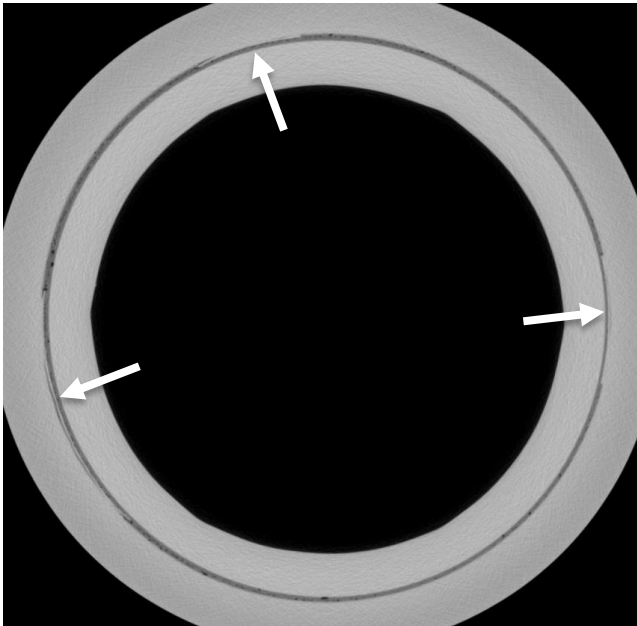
Cross sectional cut from the bonded joint of specimen C showing the exact position of the inclusions (indicated by the arrows).
